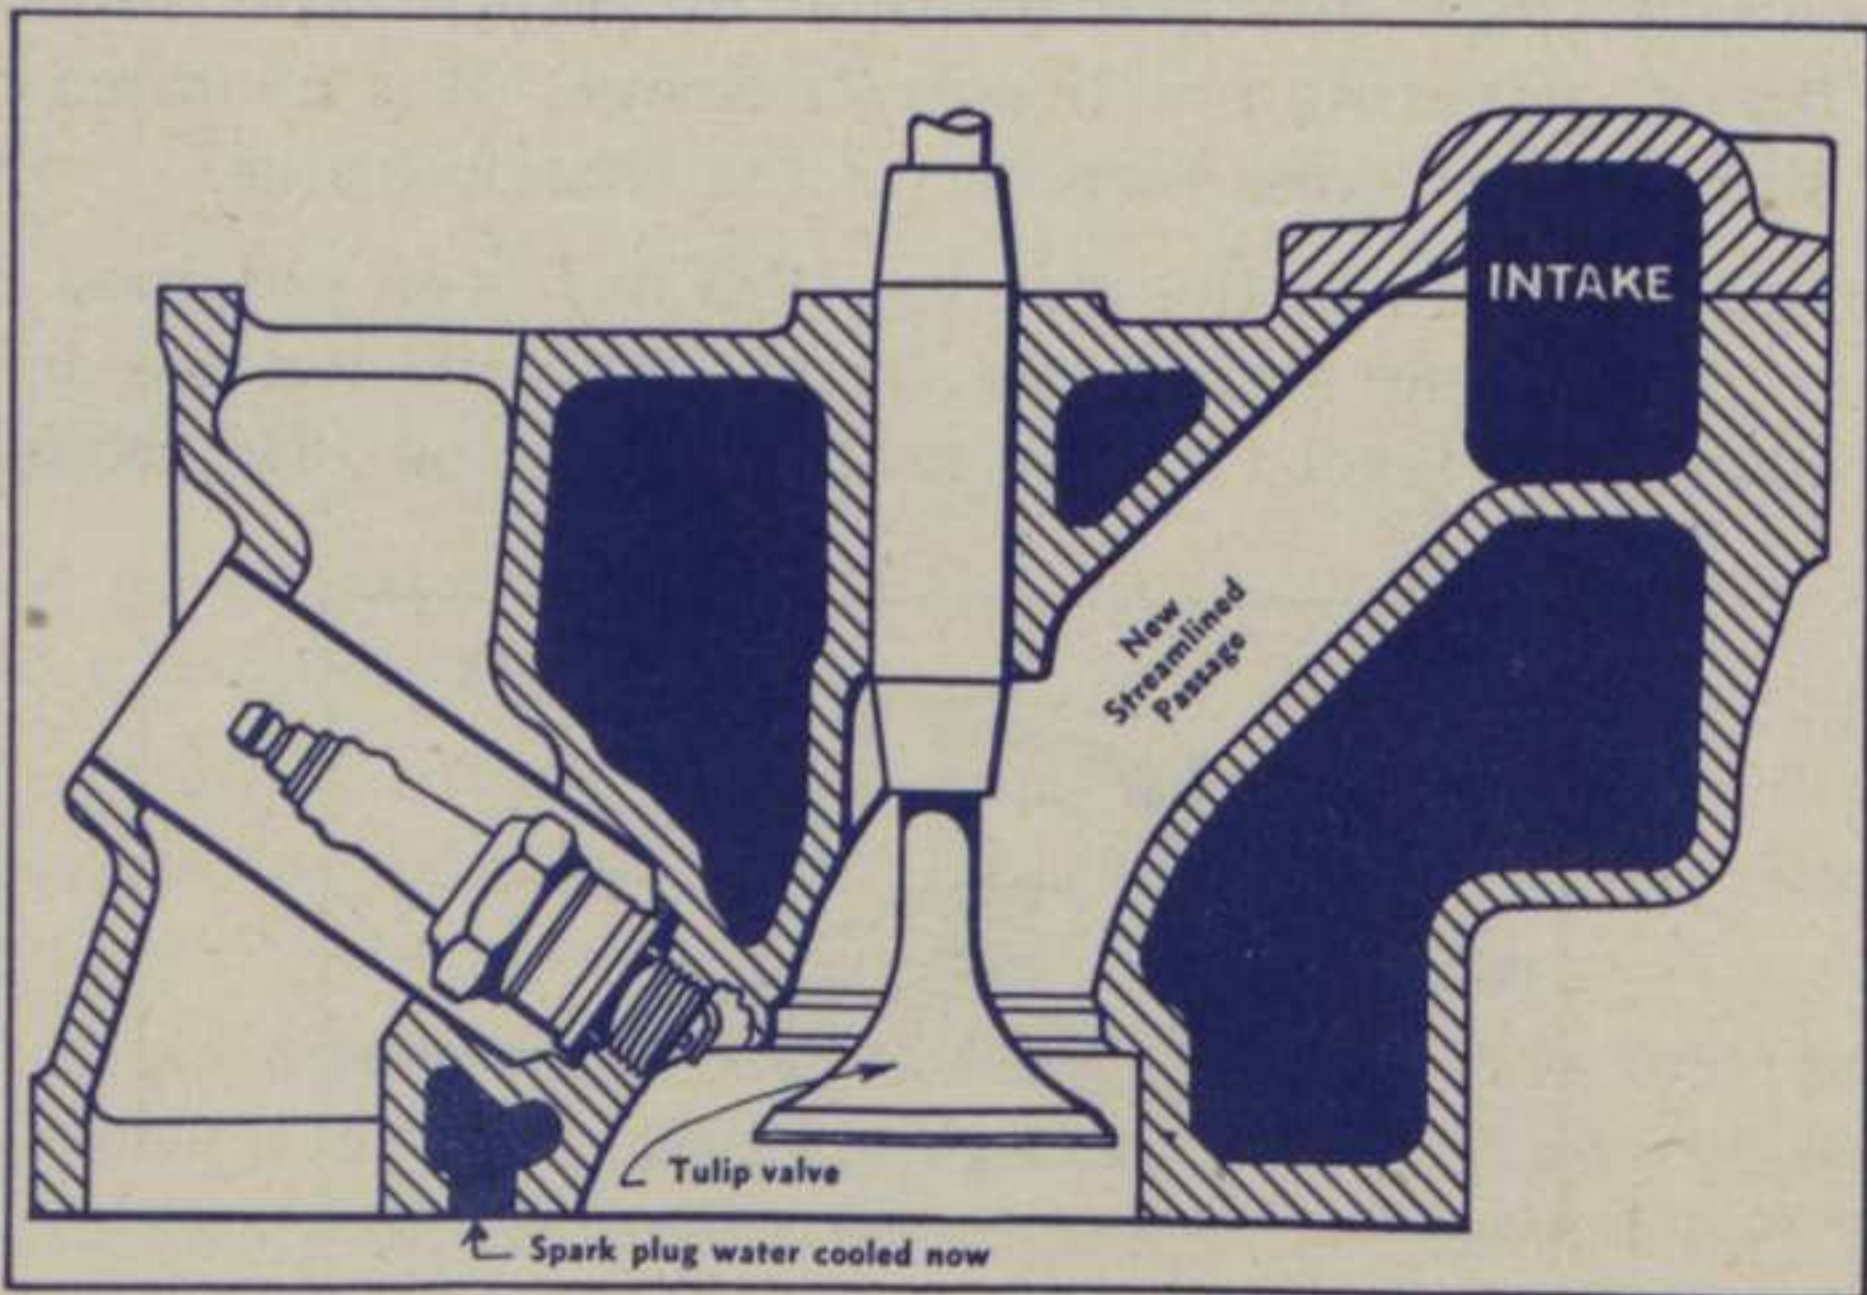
Sectional sketch showing improvements in Ambassador cylinder and manifold. →
